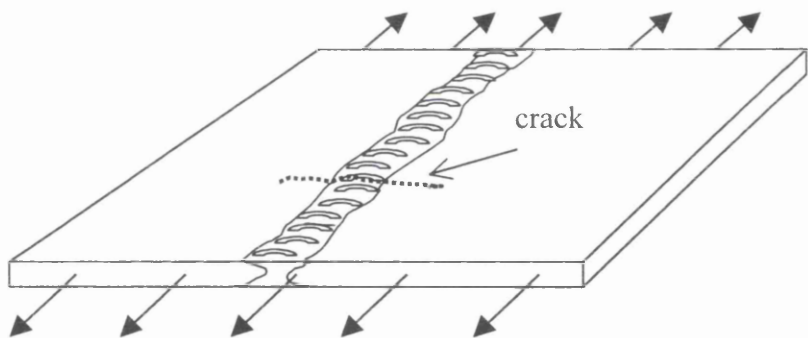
Through thickness crack perpendicular to a weld line
